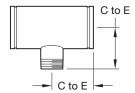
(1 OF 3) FIGURE 323 FABRICATED GROOVE X GROOVE X MALE THREAD REDUCING TEES (SEGMENT WELDED) NOMINAL DIMENSIONS
